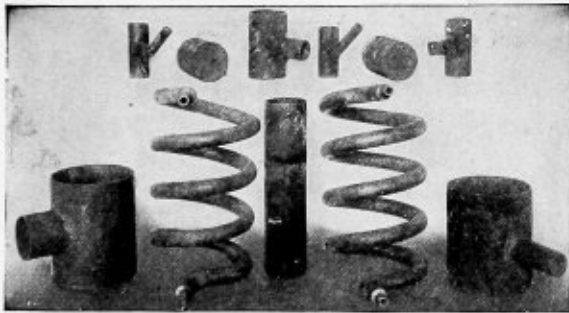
Thin Metal Pieces Welded with Metallic Electrodes
